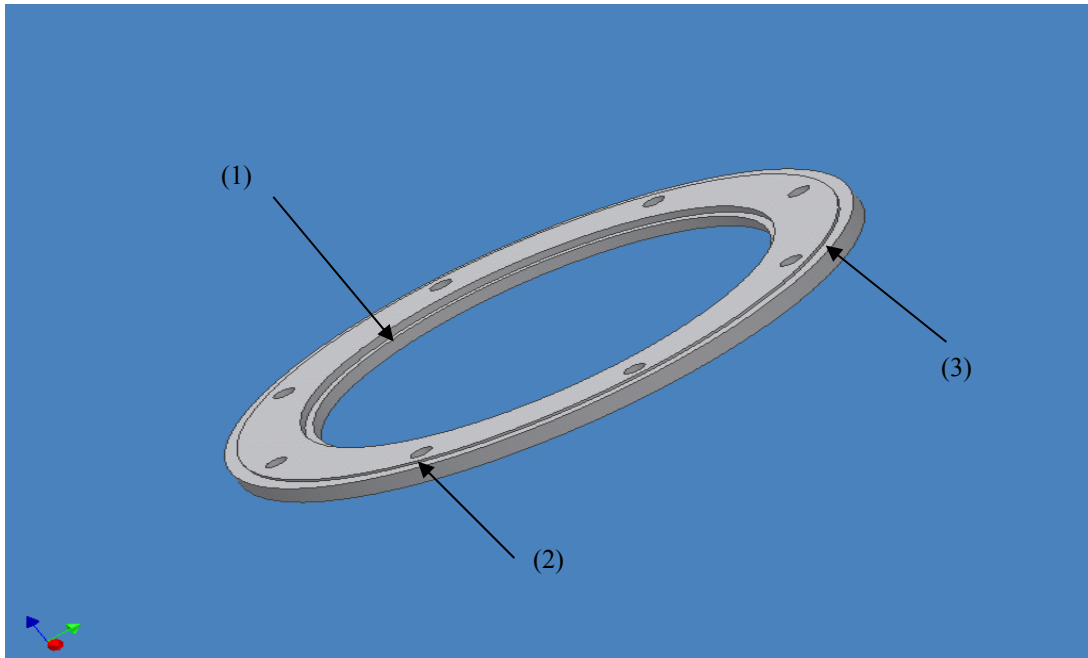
Flange – (1) Flange Seating; (2) Assembly Bolt Holes; (3) Gasket Groove
